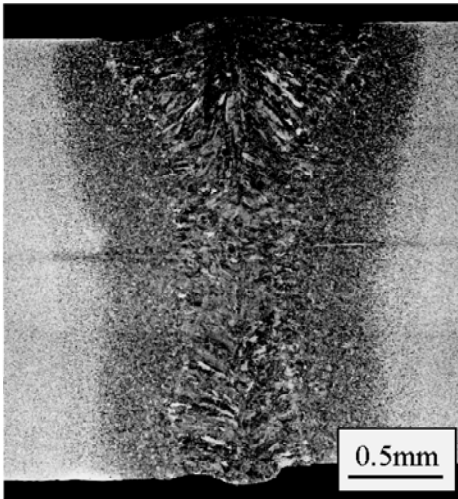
Macrostructure of the laser welded HDT580X steel joint (2.0 kW, 2.1 m/min) with hardness measurement line marks
